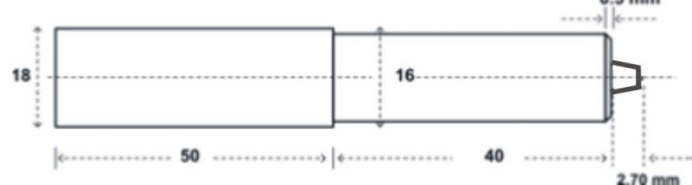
Friction stir welding taper cylindrical tool.
